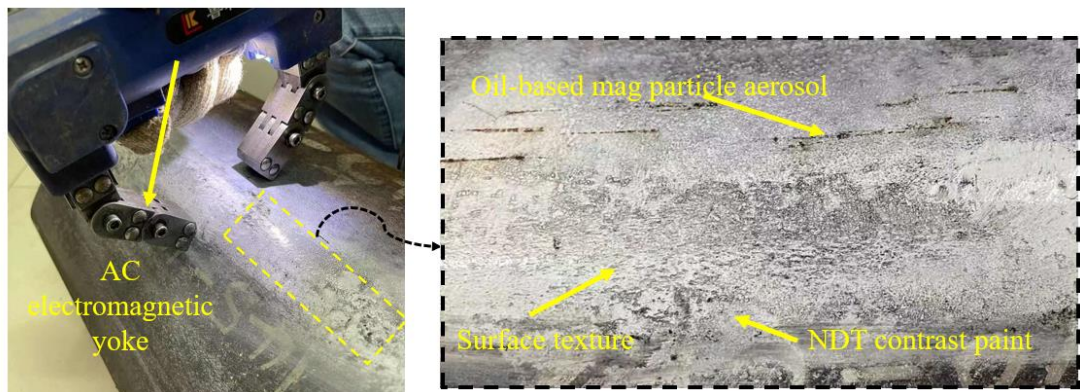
Magnetic particle inspection method for surface crack detection
